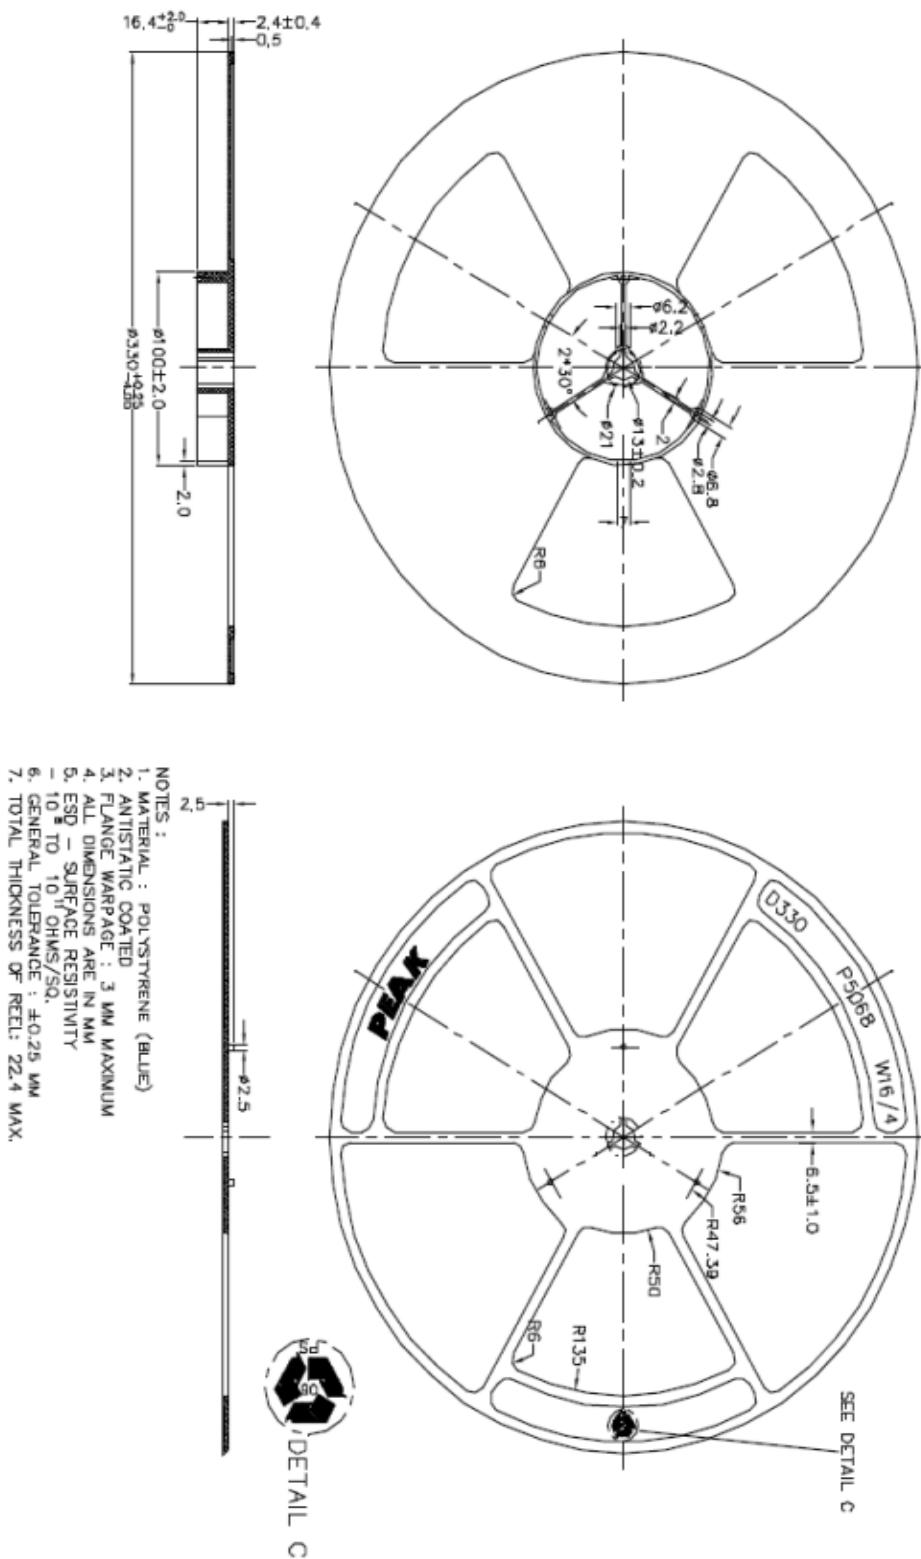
FT120T, FT122T TSSOP Reel Dimensions
